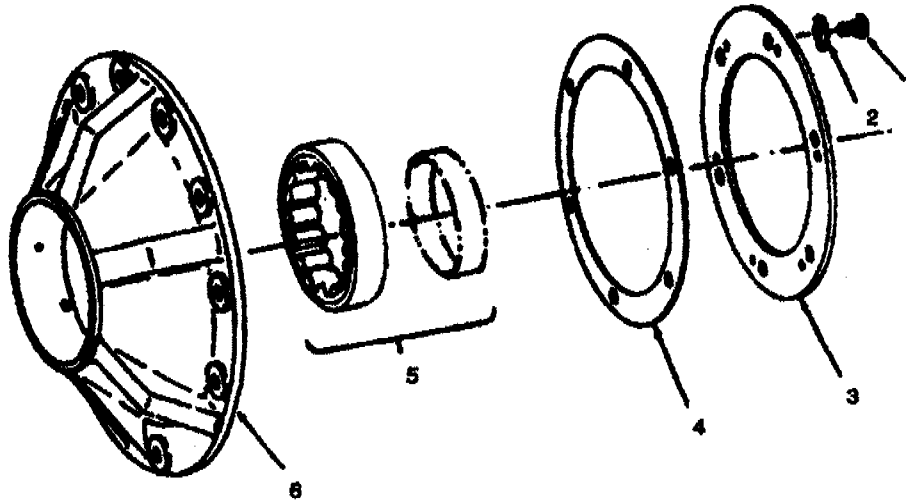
Propeller Shaft Rear Bearing Support Assembly (T53-L-15).
